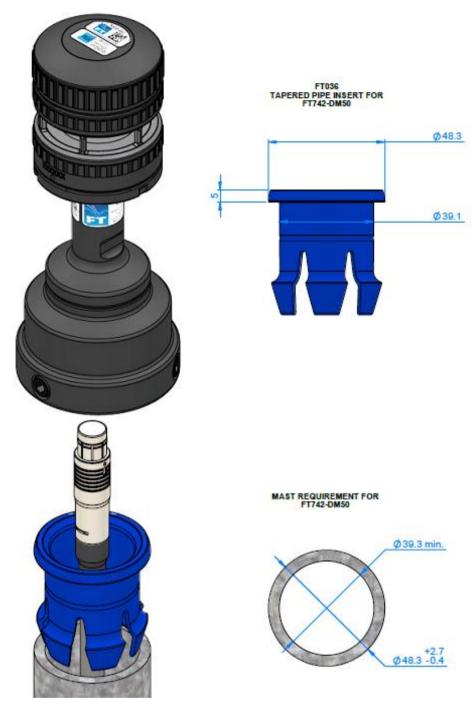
DM50 Mounting Installation and using the FT036 Tapered Pipe-Insert
